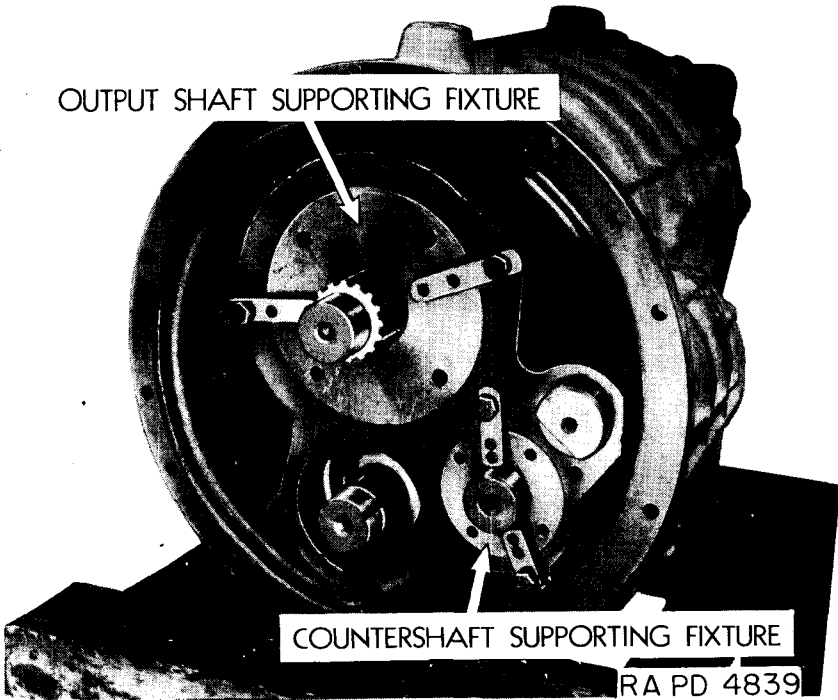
TRANSMISSION WITH FIXTURES IN PLACE
